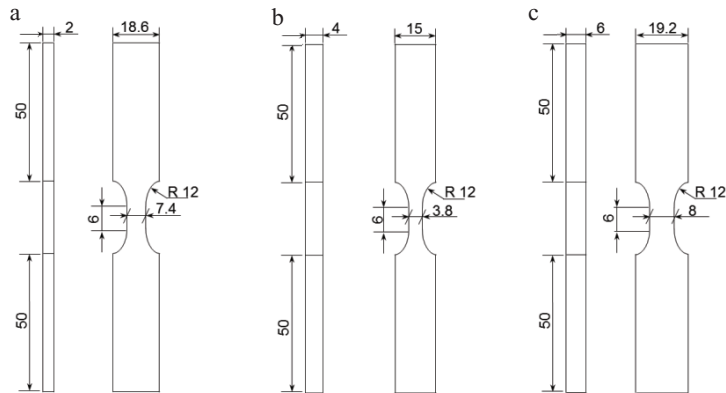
Geometry of fatigue specimens with (a) 2 mm, (b) 4 mm and (c) 6 mm thickness.
